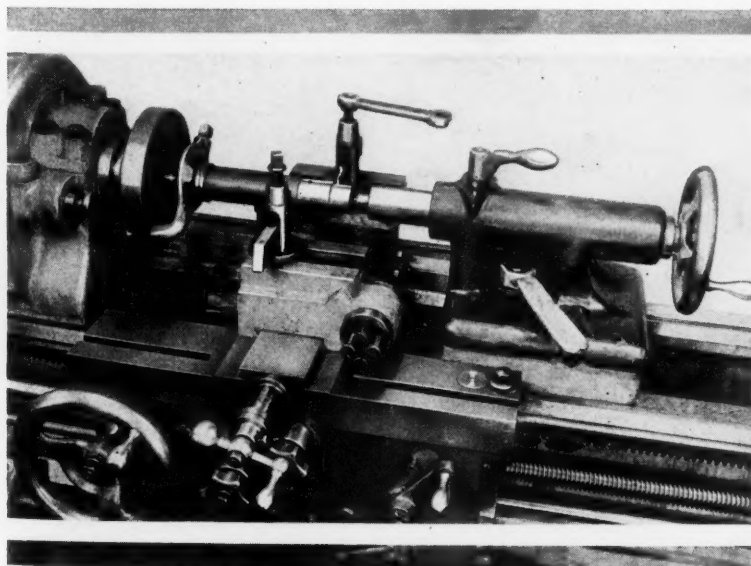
Cincinnati Lathe & Tool Co.'s Lathe Equipped for the Rapid Machining of Shouldered Shafts. The Tool in the Front Holder Turns the Different Diameters, while the Square-nose Tool in the Independently Adjustable Rear Holder Necks the Shaft for Grinding. Micrometer Stops Control the Diameters and Length of the Cuts. Four, Six or Eight Diameter Stops are Available
